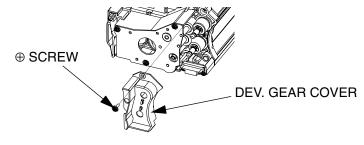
Removal of the Idler Gear (Z20) Assembly
